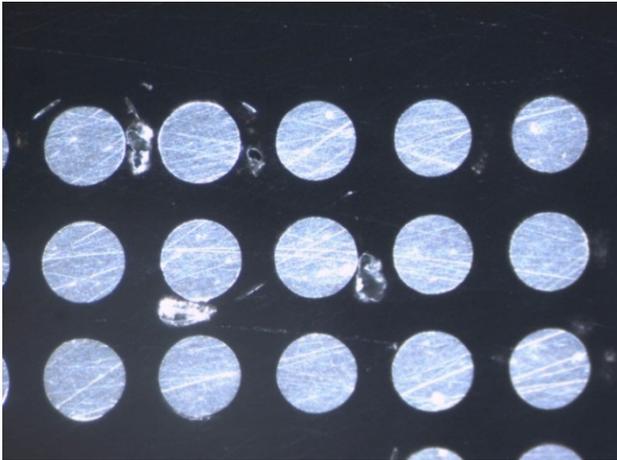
Detailed planar cross-section image for material C – Slight voiding
